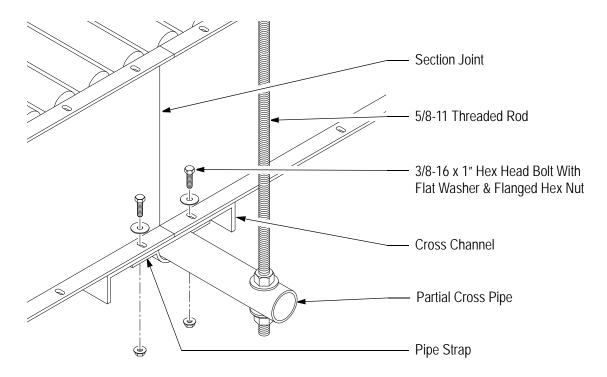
Installing a Ceiling Hanger at a Double-Wide Conveyor Section Joint
